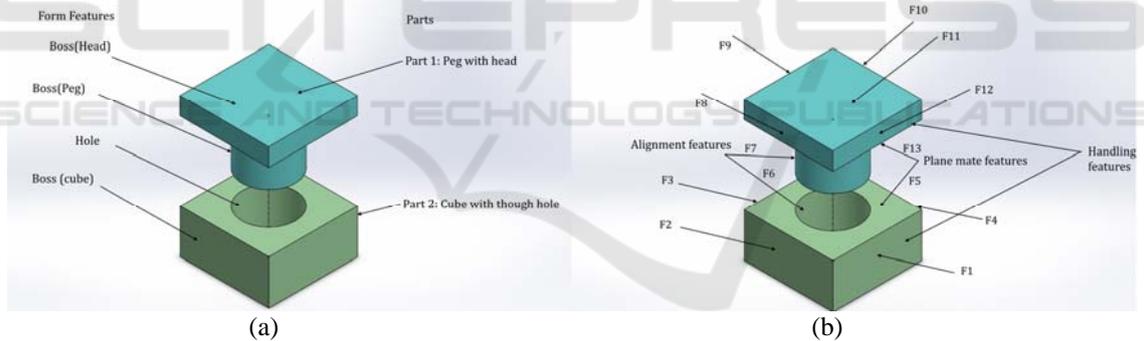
(a) Peg and through-hole cube assembly, parts and features (b) Peg and through-hole cube assembly, faces assembly features.
